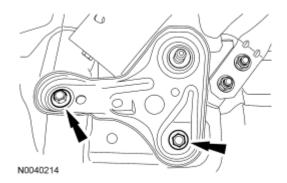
Locating Subframe Brackets And Bolts Finger-Tight Courtesy of FORD MOTOR CO.
